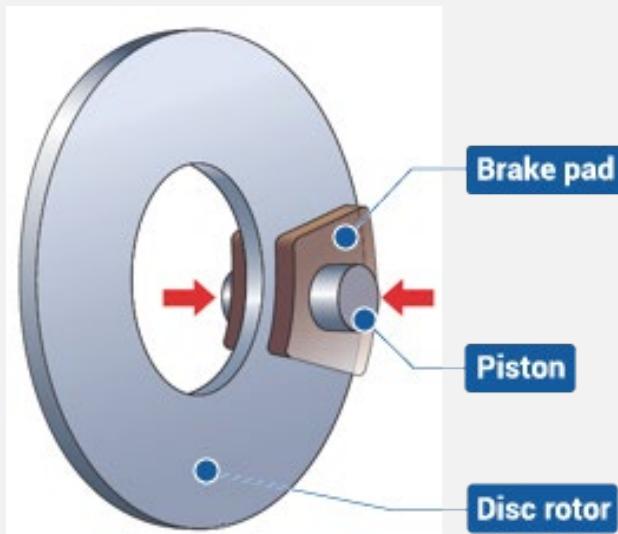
SIMPLIFIED VIEW OF DISC BRAKE
